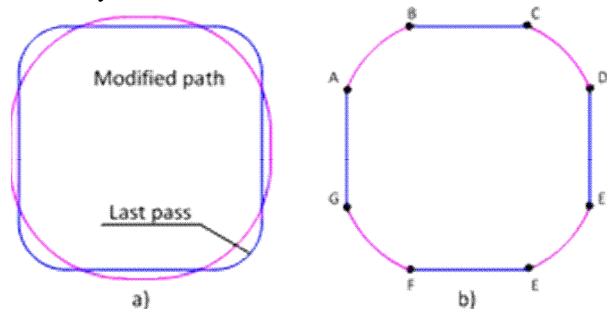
Non-conformation of tool path (b) The conformed tool path [3]
